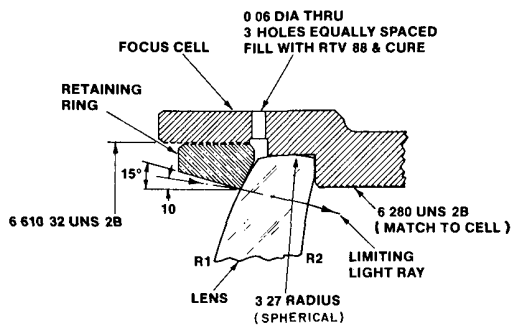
Detail view of the glass-to-metal interface for the front focussing element of the dual-channel objective assembly. Dimensions are inches. From Ref. 5.
